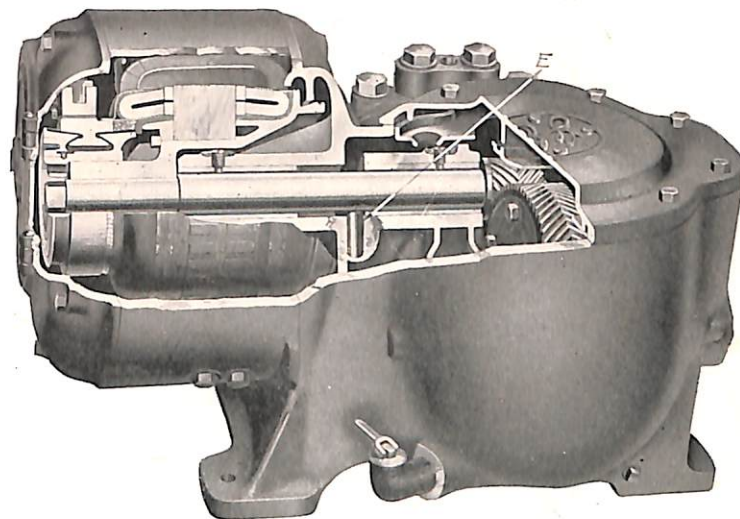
Type CP-27 Air Compressor, Section View Showing Motor End
